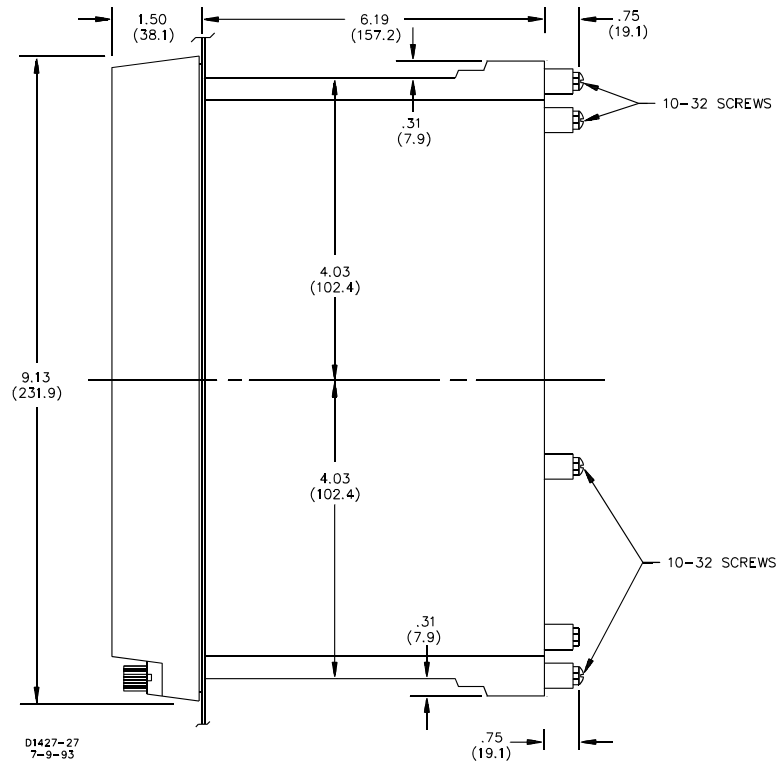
S1 Case, Double-Ended, Outline Dimensions, Semi-Flush Mounting, Side View
